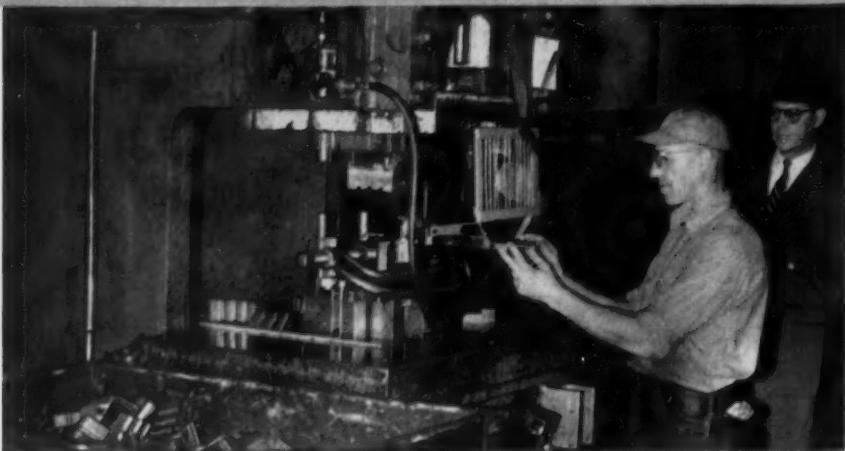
This illustration shows the insurance company engineer witnessing the testing of a slide feed device that has been installed on a forming die used in the Maytag plant.
